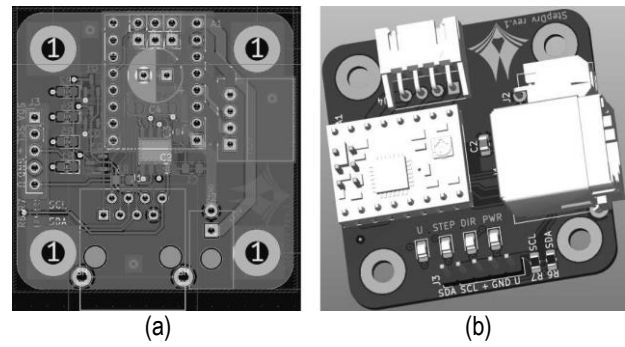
PCB design (a) and 3D view (b) of board's top side
